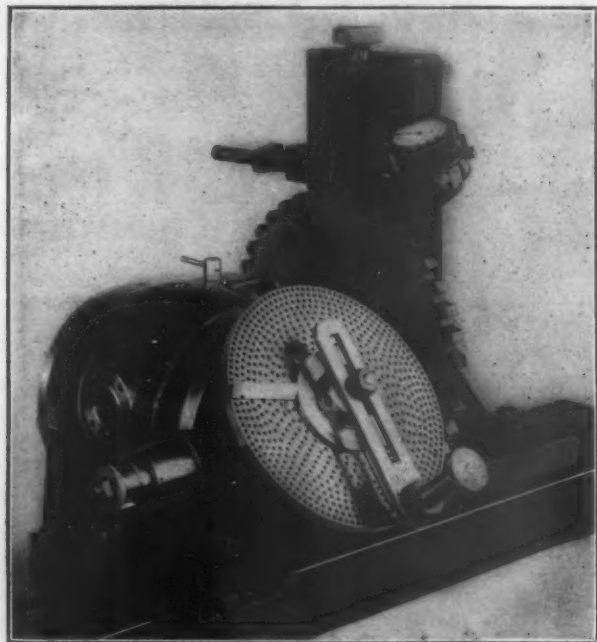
Arrangement for Testing the Accuracy of the Teeth of the Dividing Head Worm Wheel.
